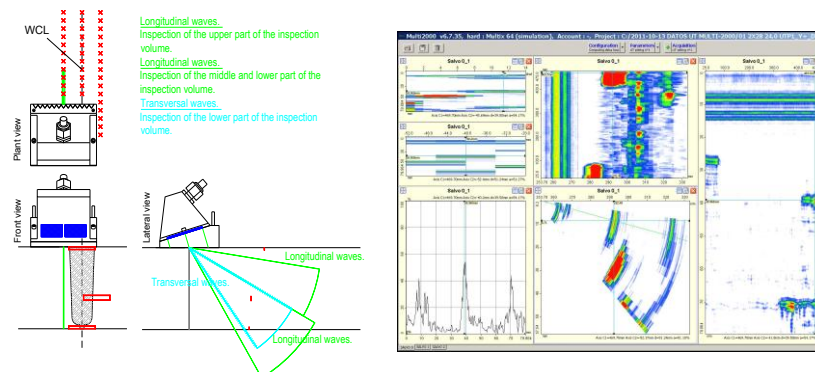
Scanning for detection of defects perpendicular to the weld
